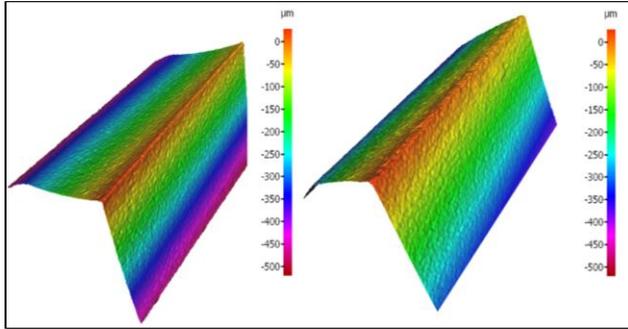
Cutting edge form after machining at the length of; (a) 15 cm, and (b) 300 cm with feed speed of 500 mm/min and spindle speed of 8000 rpm
